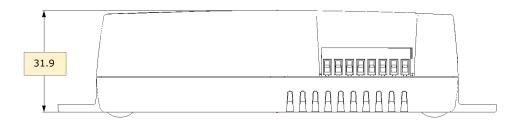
LDSBus Isolated IO Controller Dimension - Side View
